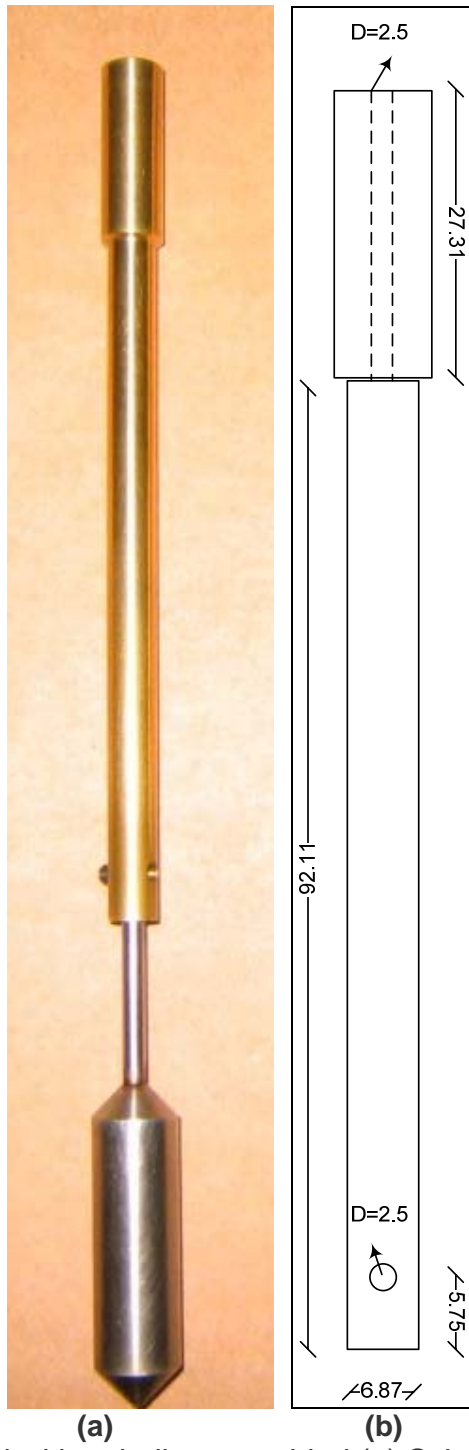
Rigid rod with spindle assembled (a) Schematic of rigid rod (b)
